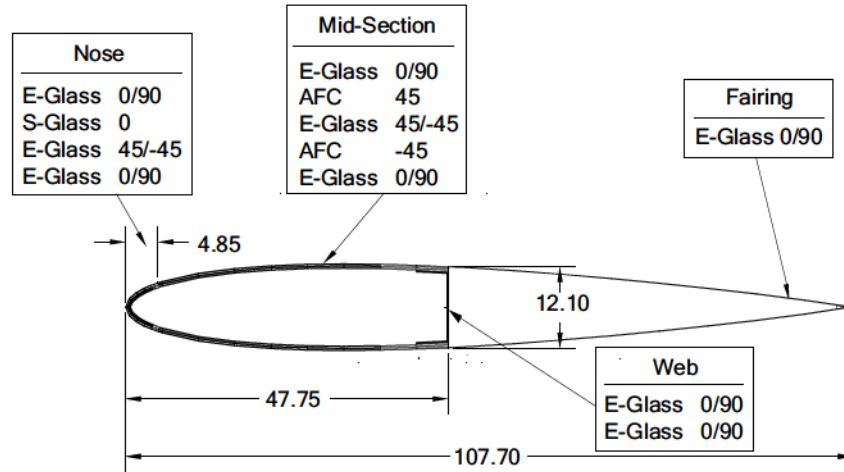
Dimensions (in mm) and materials used in the different parts of the ATR wing.
